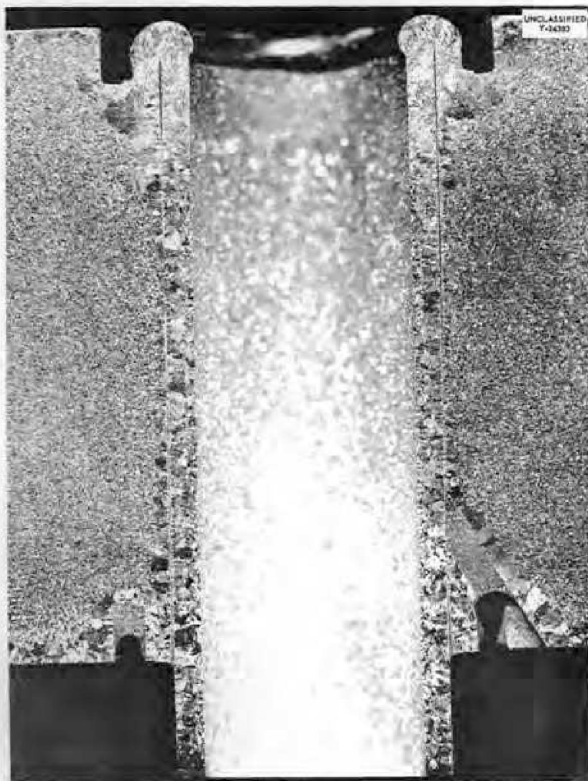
Cross Section of a Typical Welded and Brazed Tube-to-Tube-Sheet Joint.
